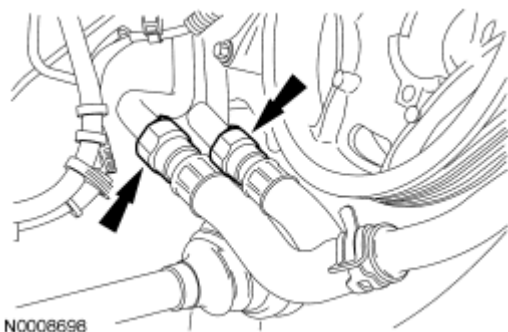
Locating Quick Disconnect Oil Cooler Coolant Tubes
